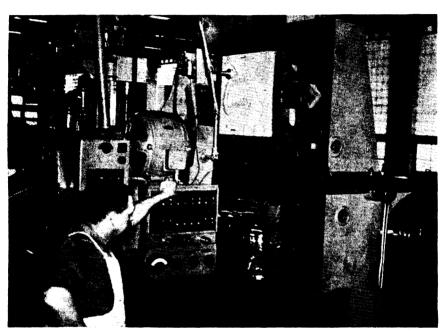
Sinking a die impression with a large duplicating machine. The most practical method of making such dies is to heat-treat them after machining; the steel should be capable of being hardened to between 300 and 450 BHN, depending upon which alloy is to be cast.
